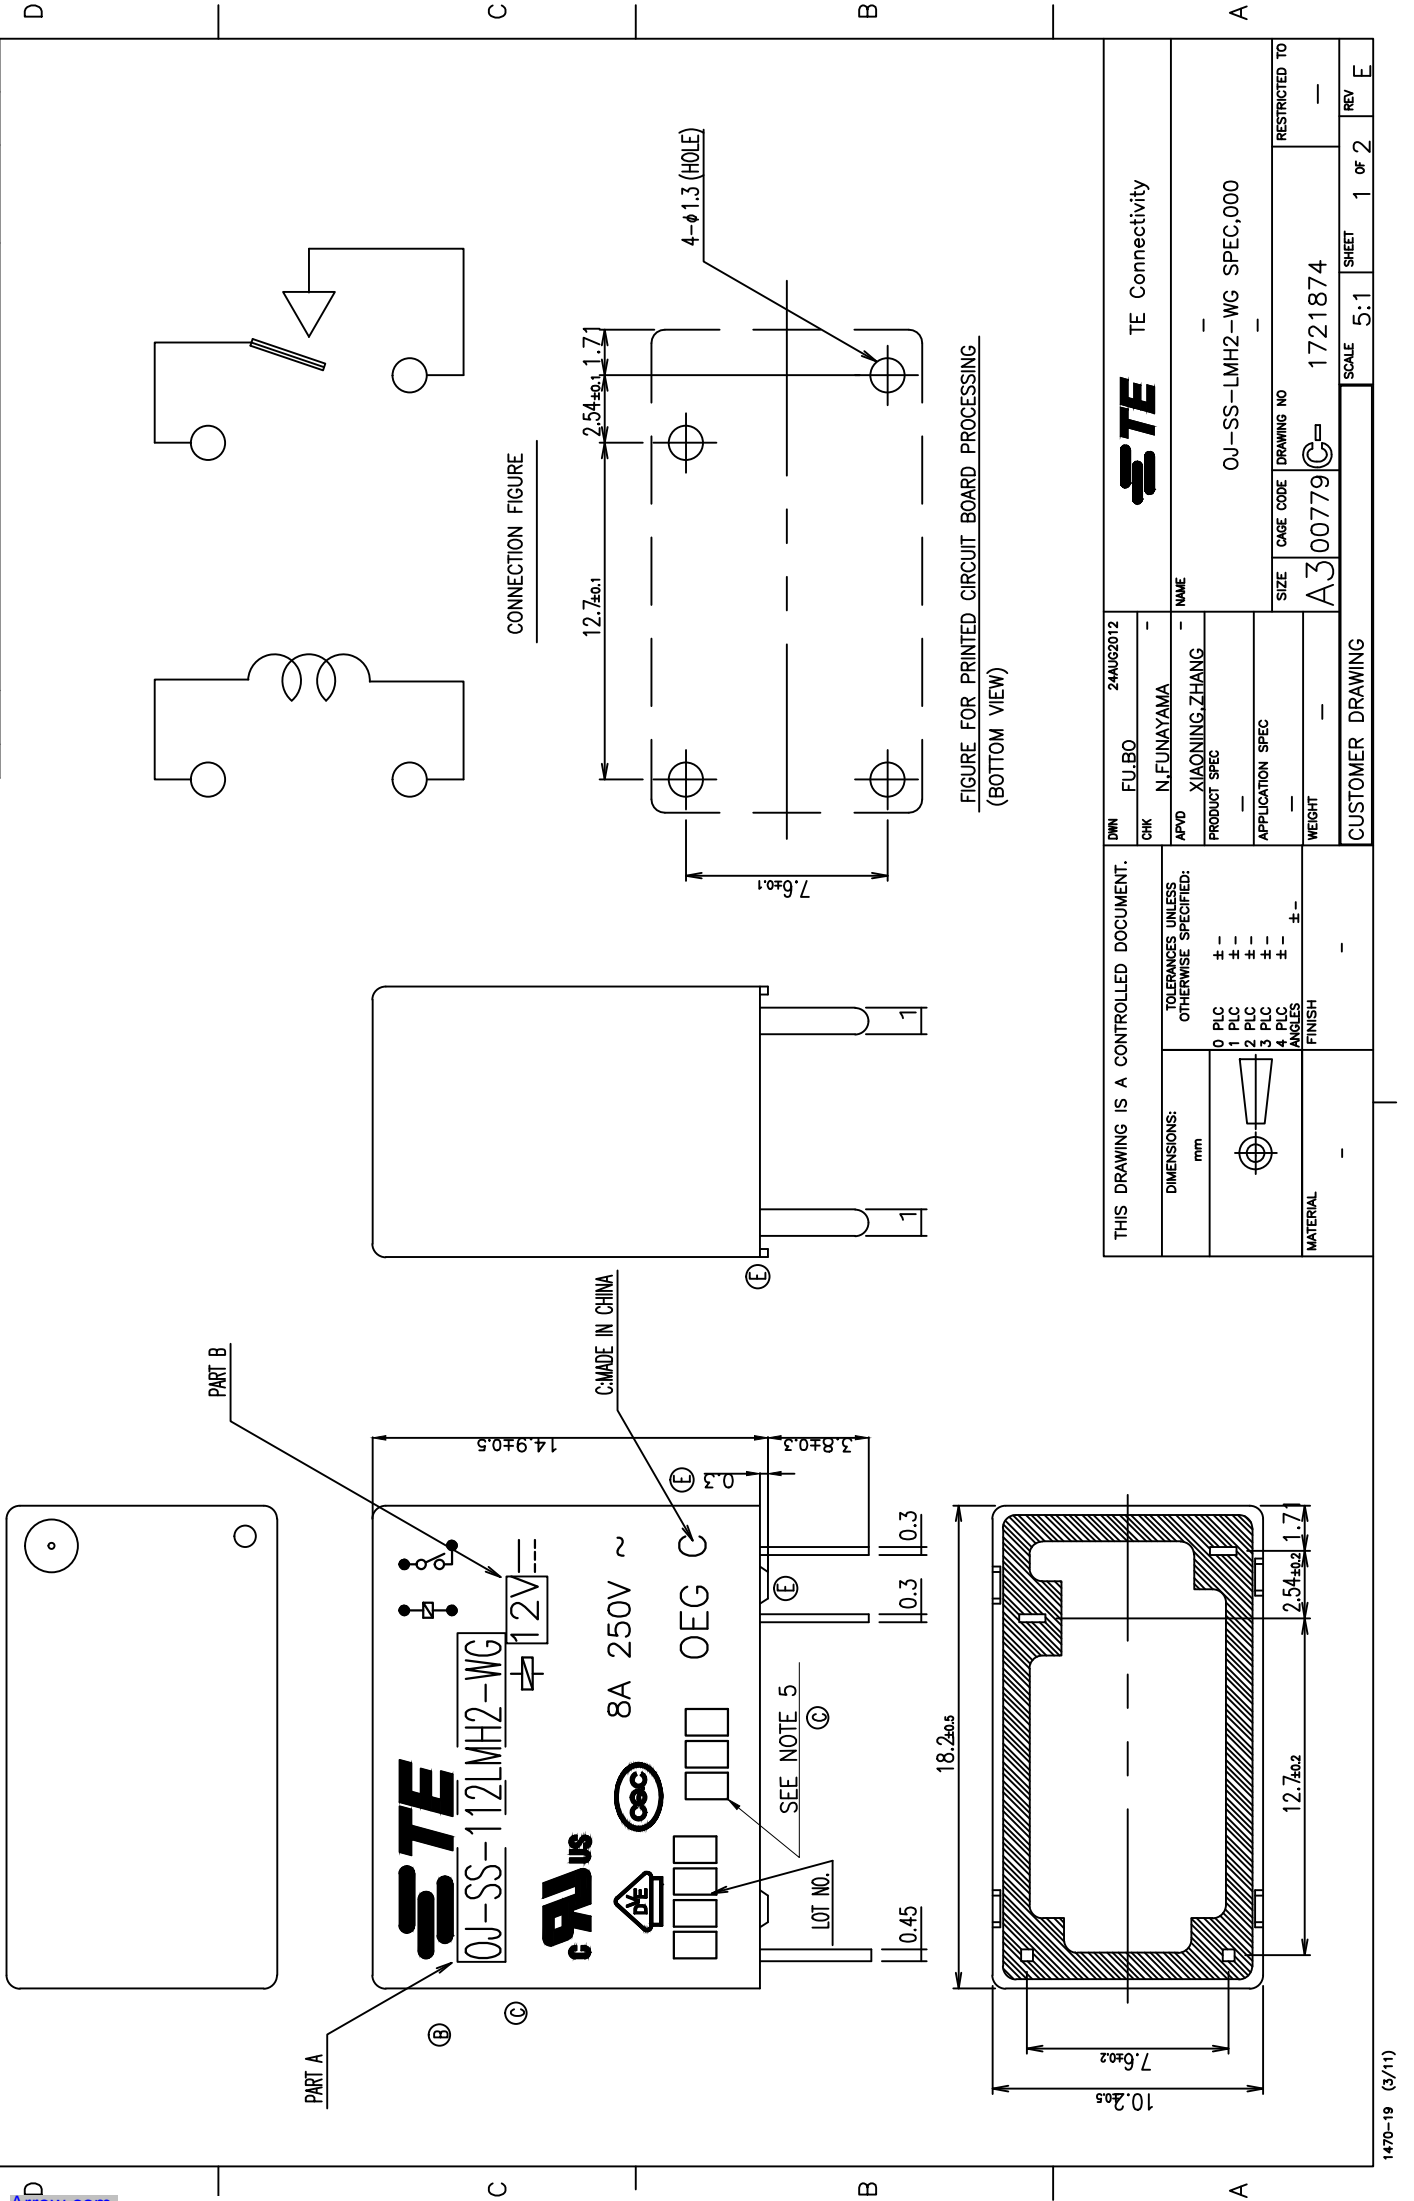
FIGURE FOR PRINTED CIRCUIT BOARD PROCESSING (BOTTOM VIEW)
